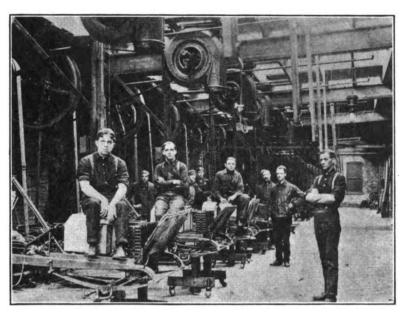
THE TESTING ROOM OF A LARGE AUTOMOBILE PLANT
